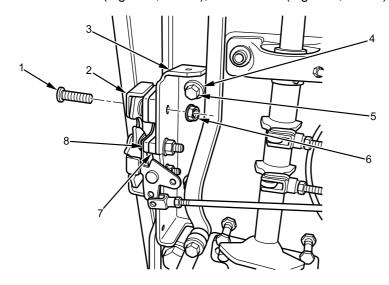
Lower Cabin Door Lock Retainer Clip Removal.
